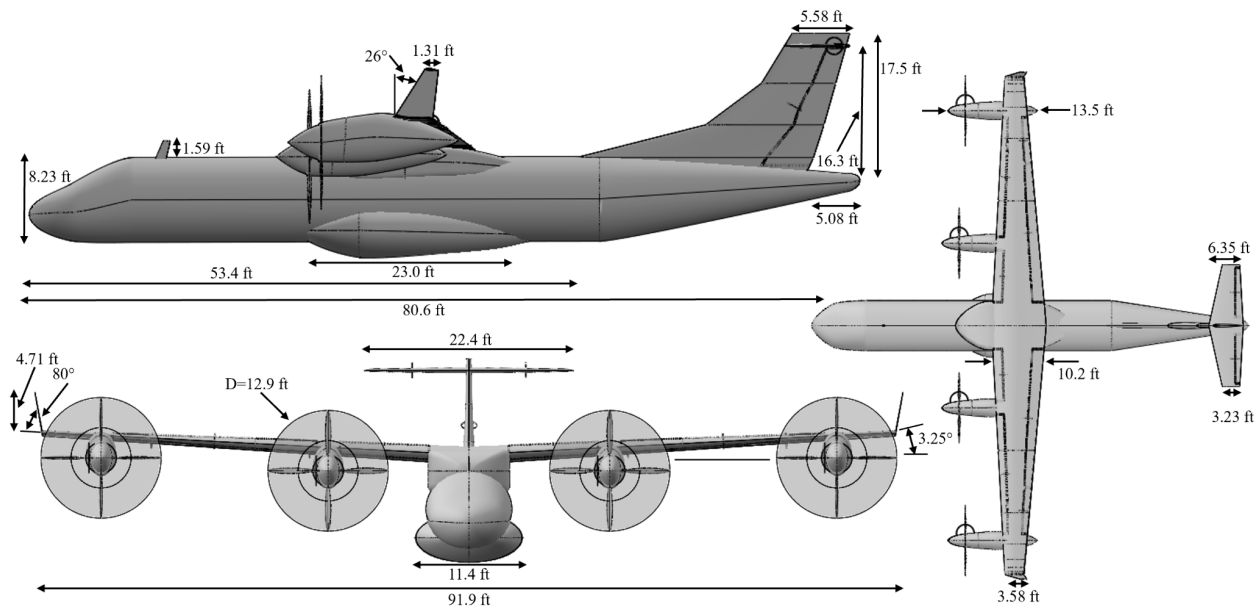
3-View Dimensioned Drawing of the Songbird-E
